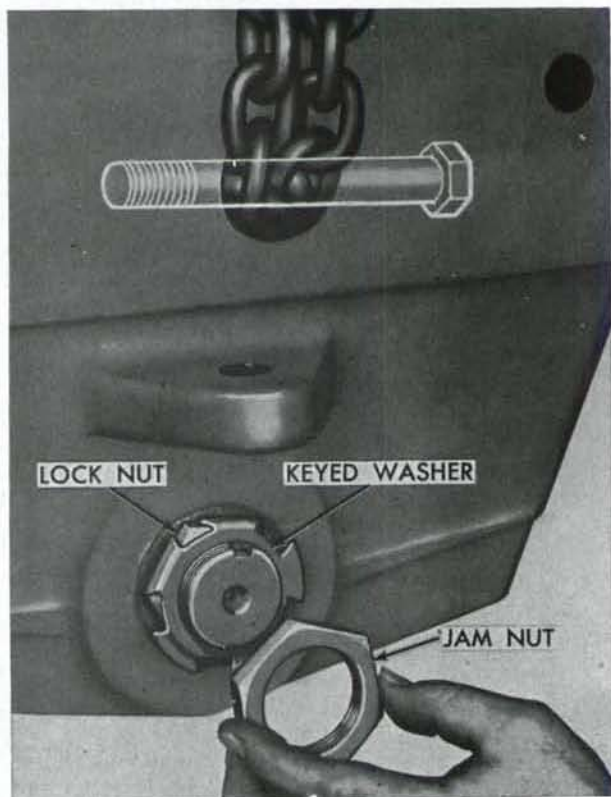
Support front of Heavy Duty Industrial tractor with chain loop and bolt, as shown, when removing front axle or pivot pin. Note method of locking front end of axle pivot pin.
